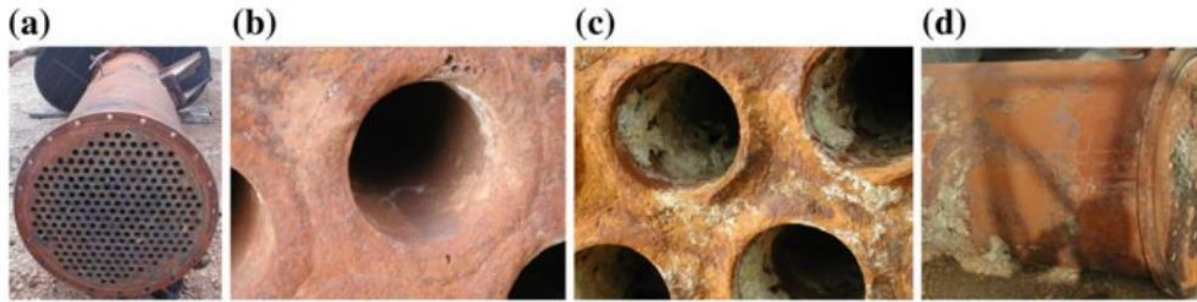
(a) an overall view of a failed heat transfer oil heater. (b) The tube sheet's general and pitting corrosion. (c) The tube-sheet and tubes' severe corrosion (deposits are accumulated inside the tubes; the ends of the tubes are out from corroded tube-sheet). (d) Corrosion of the heat transfer oil heater's exterior surface underneath thermal insulation
